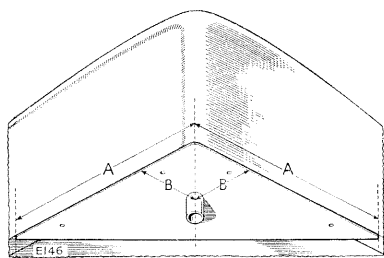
Fitting corner plate to bottom front corners of seat cushion
